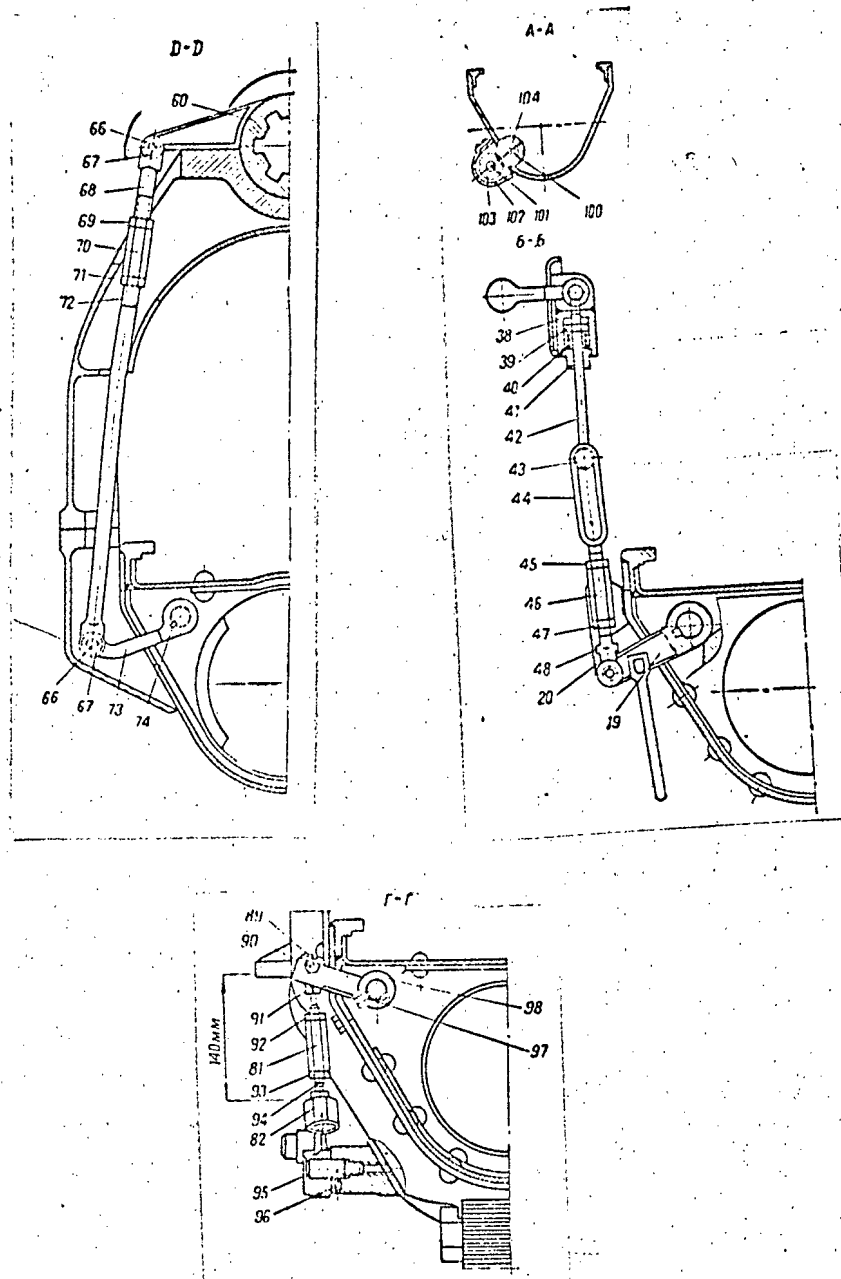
Cradle (right side, cross-sectional view)(Part 2)
